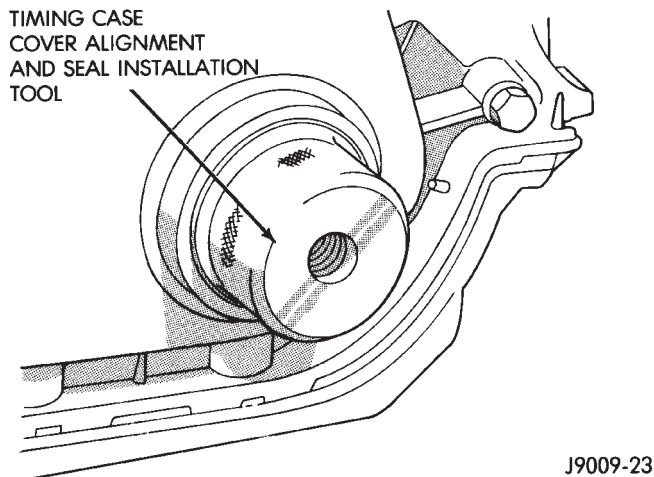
Timing Case Cover Alignment and Seal Installation Tool 6139 (J-22248)
